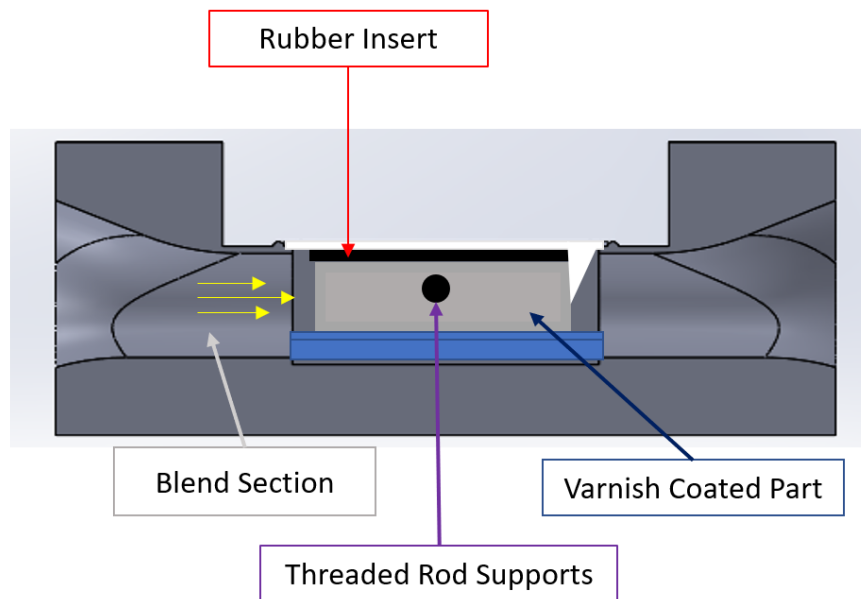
Side view of the preliminary test cell design showing the blended section and the location of the test part.
